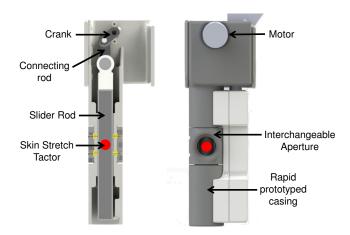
Cross-sectional view (left) and side view (right) of the skin stretch stylus. The device consists of a 4-bar crank-slider mechanism enclosed within a rapid prototyped plastic housing. The skin stretch tactor (red) imparts skin stretch to a user through friction between the tactor and the user's fingerpad, with the users' finger anchored on the aperture.
